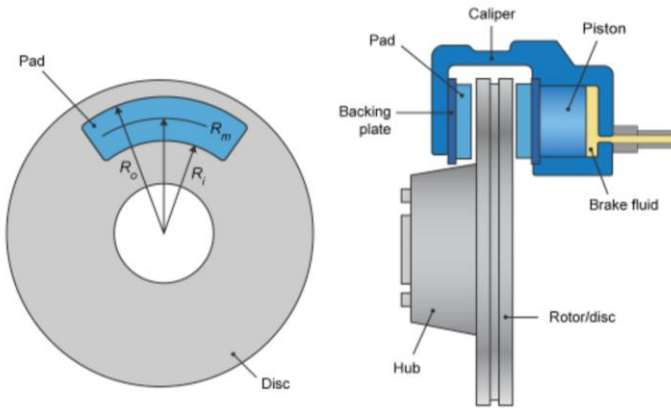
Front and side views of a disc brake system (Mathworks Inc., 2023).
